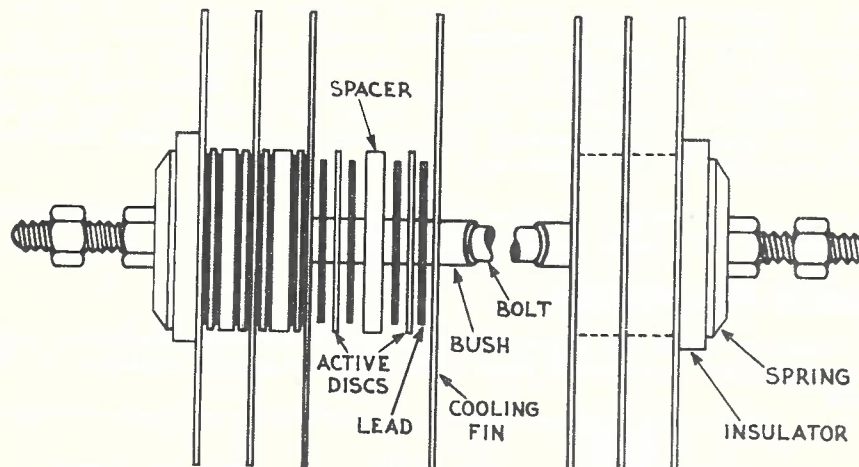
MECHANICAL ASSEMBLY OF METAL RECTIFIER.
